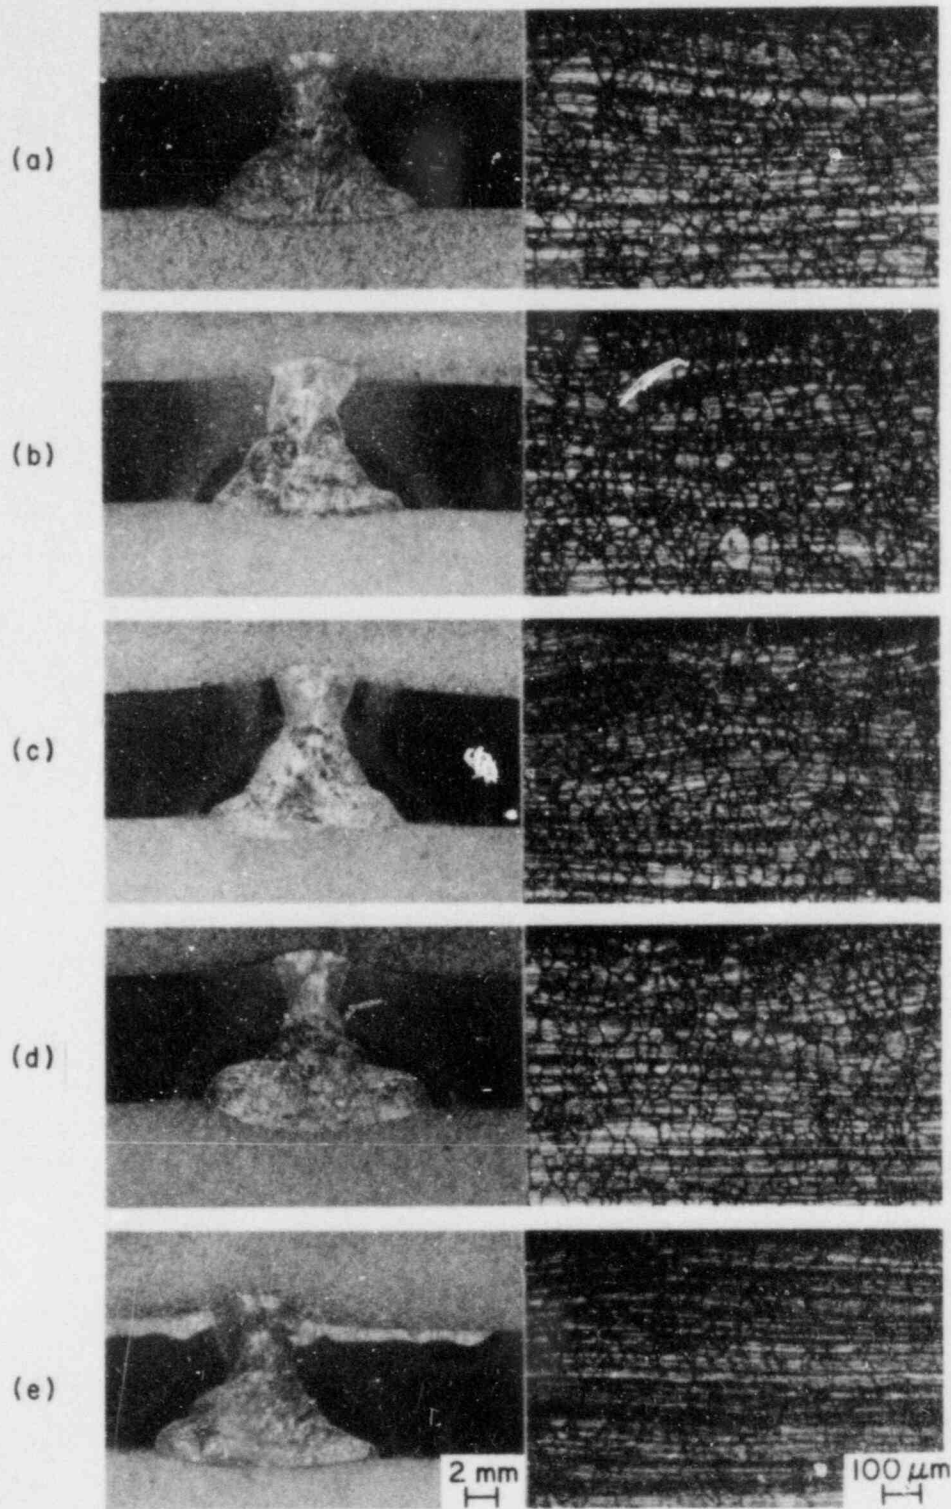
ASTM A262-A Test Results for Type 304 SS (Heat No. 53319) Pipe Weldments. (a) Conventional weld, (b) IHSI, (c) HSW, (d) LPHSW, and (e) CRC.
